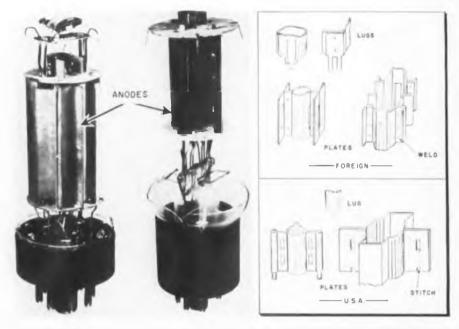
(1) Aluminized iron plate on imported 61.6 (1). Fig. 10 (r) Simple plate designs cut tooling costs
